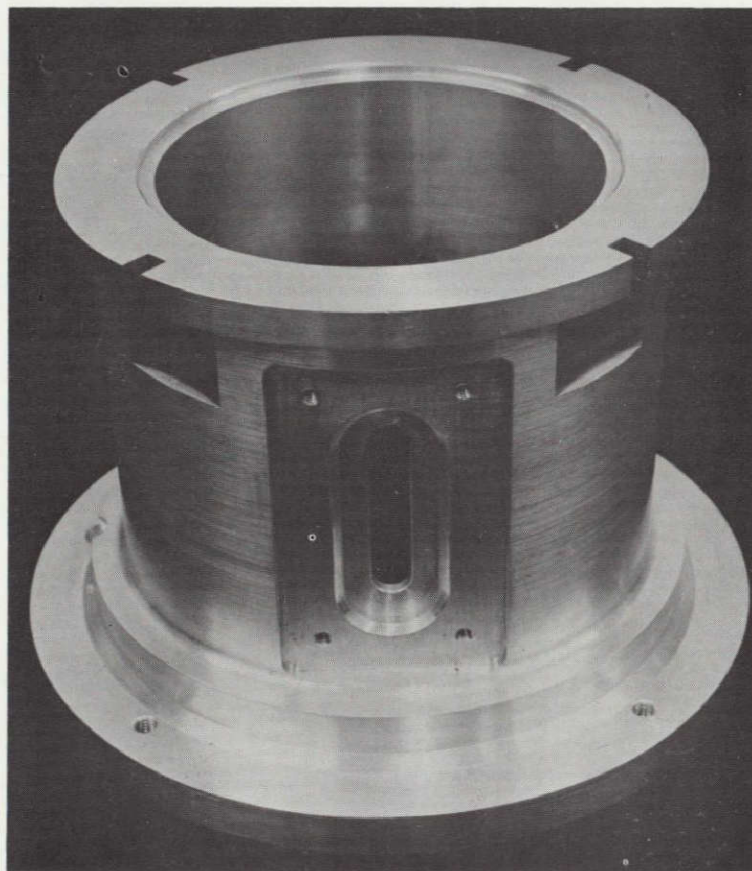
Inlet and Impeller Cover Showing Optical Window Opening
